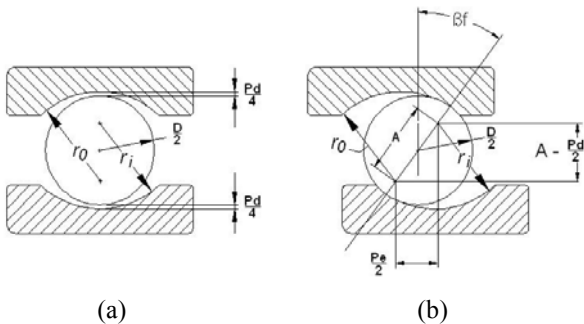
Cross section of a radial ball bearing showing ball-race contact due to axial shift of inner and outer rings. (a) Initial position. (b) Shifted position
